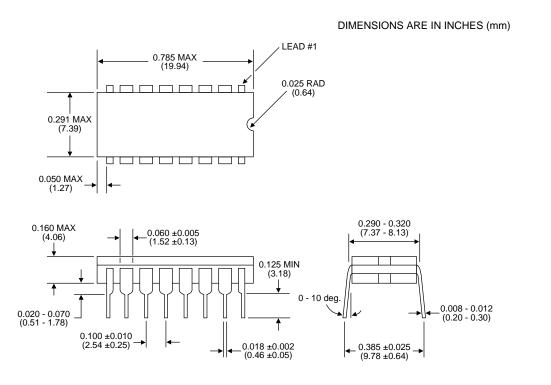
DD-03182DC CERAMIC DIP (JE) MECHANICAL OUTLINE
